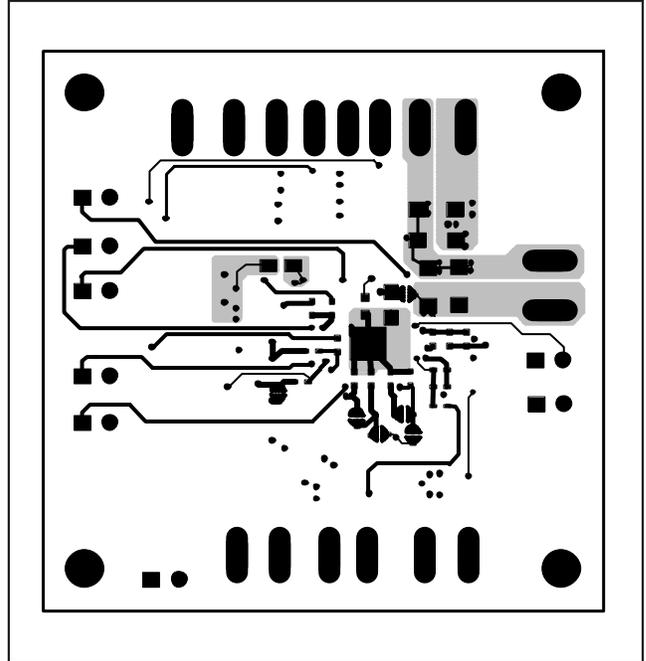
MAX8857A EV Kit PCB Layout—Bottom Layer
